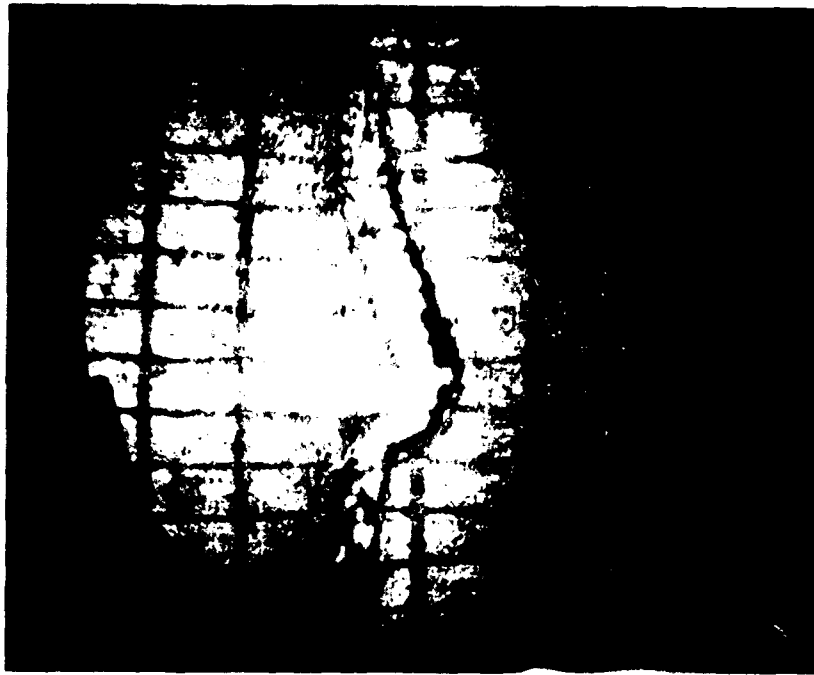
TENSILE SPECIMEN FRACTURE ON THE SCOPE OF THE OPTICAL COMPARATOR
